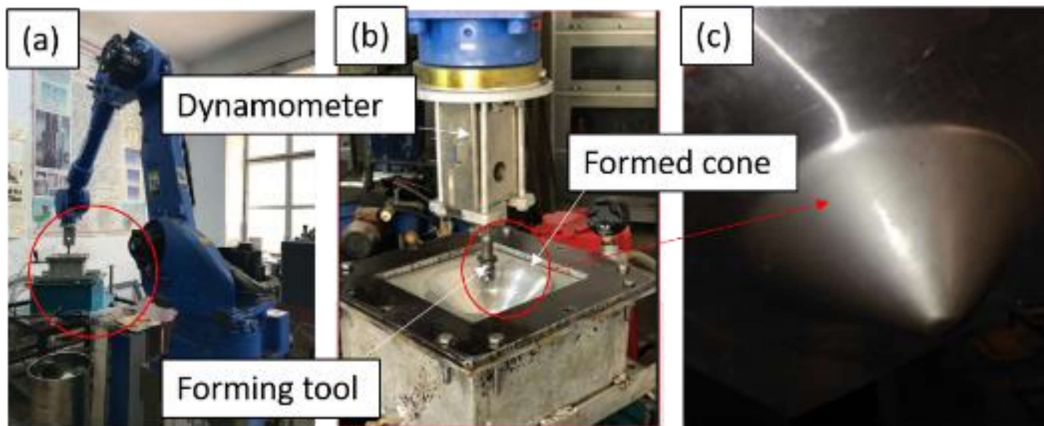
(a) Setup with tool dynamometer, (b) tool used for sheet deformation, (c) deformed sheet.
